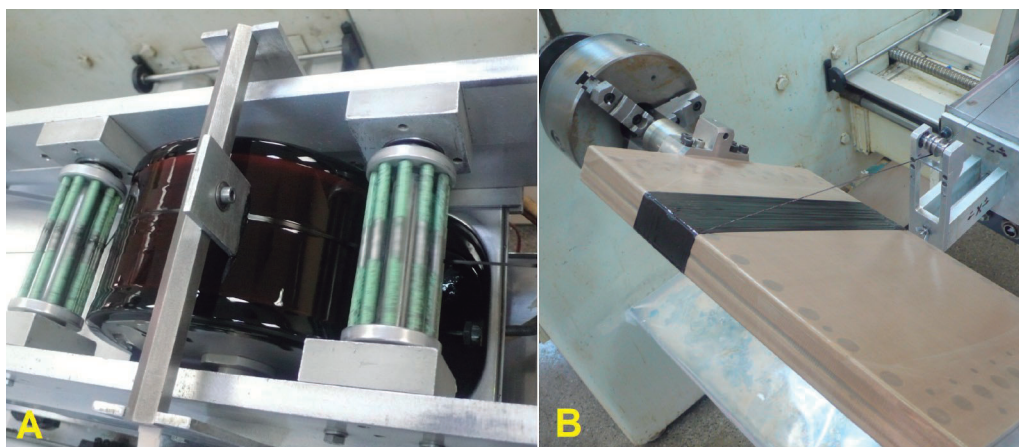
Filament winding process: (A) Resin bath and (B) rotating mold
